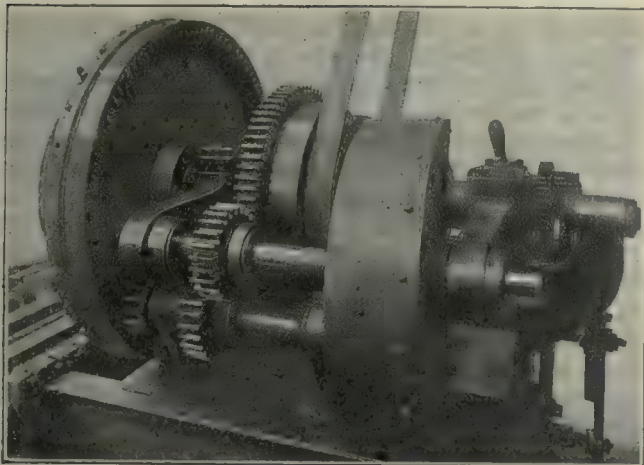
GEARING AND FACEPLATE DRIVE ON LATHE SHOWN IN FIG. 6
